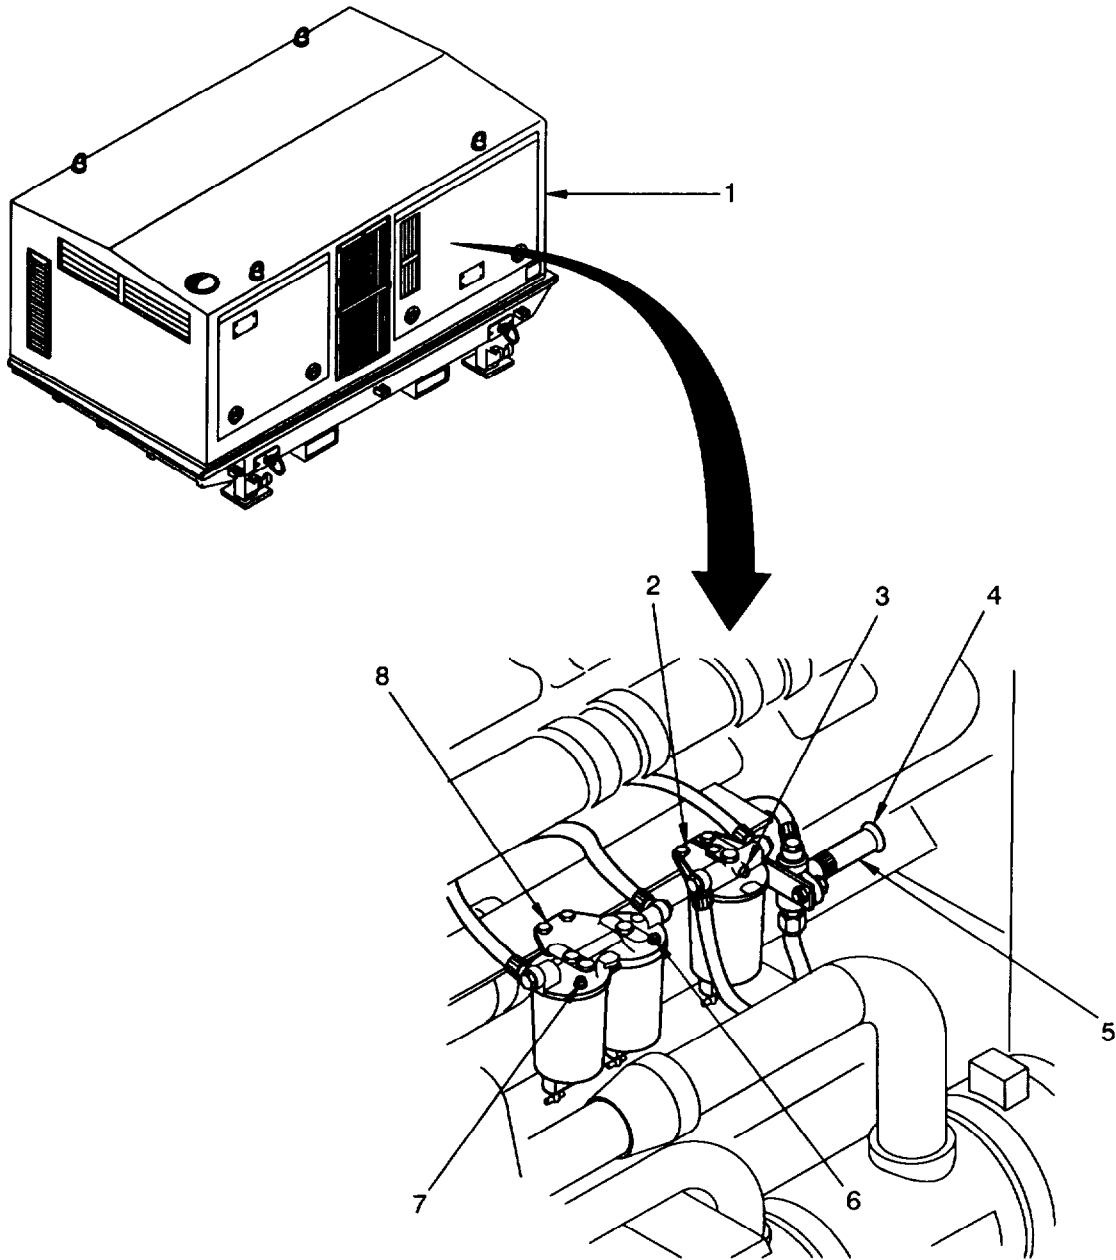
Diesel Engine Fuel Pipes and Fuel Filter Assembly Maintenance.
